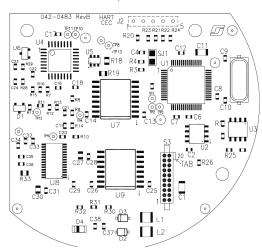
Optional Communication Expansion Card (CEC) PCB Connection
